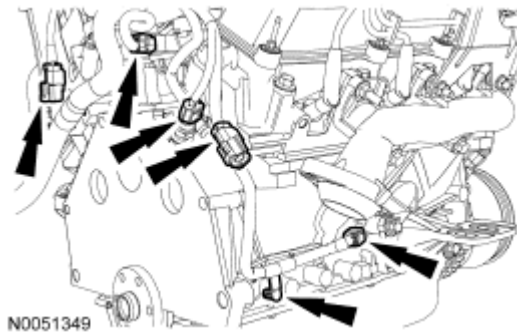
Locating Camshaft Position Sensor & Oil Pressure Switch
